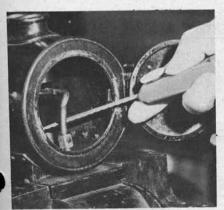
A pad-saw, handle makes use of broken hacksaw blades.
